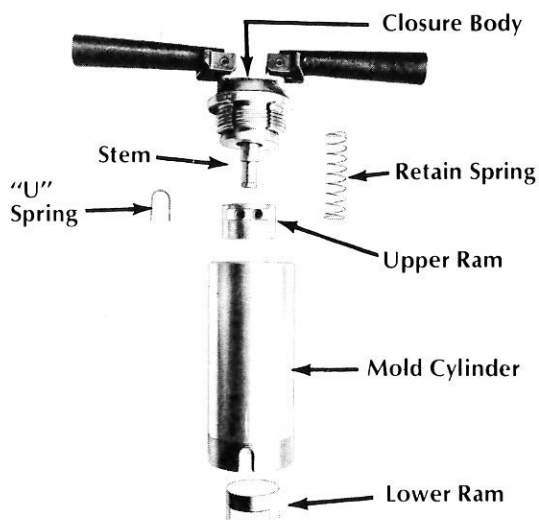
MOLD AND TETRAMET® MOLD CLOSURE
